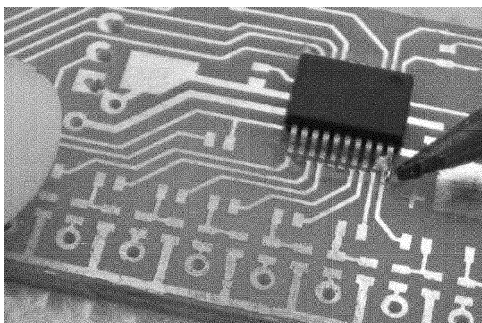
then fix the chip in place by soldering a pin at the opposite corner.
